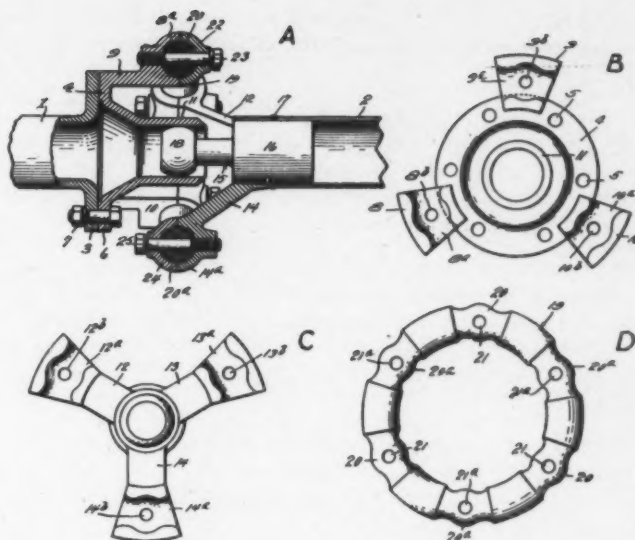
A—Section showing details of universal joint. B—End elevation of one of hub sections. C—The other hub. D—Flexible member which provides driving connection
